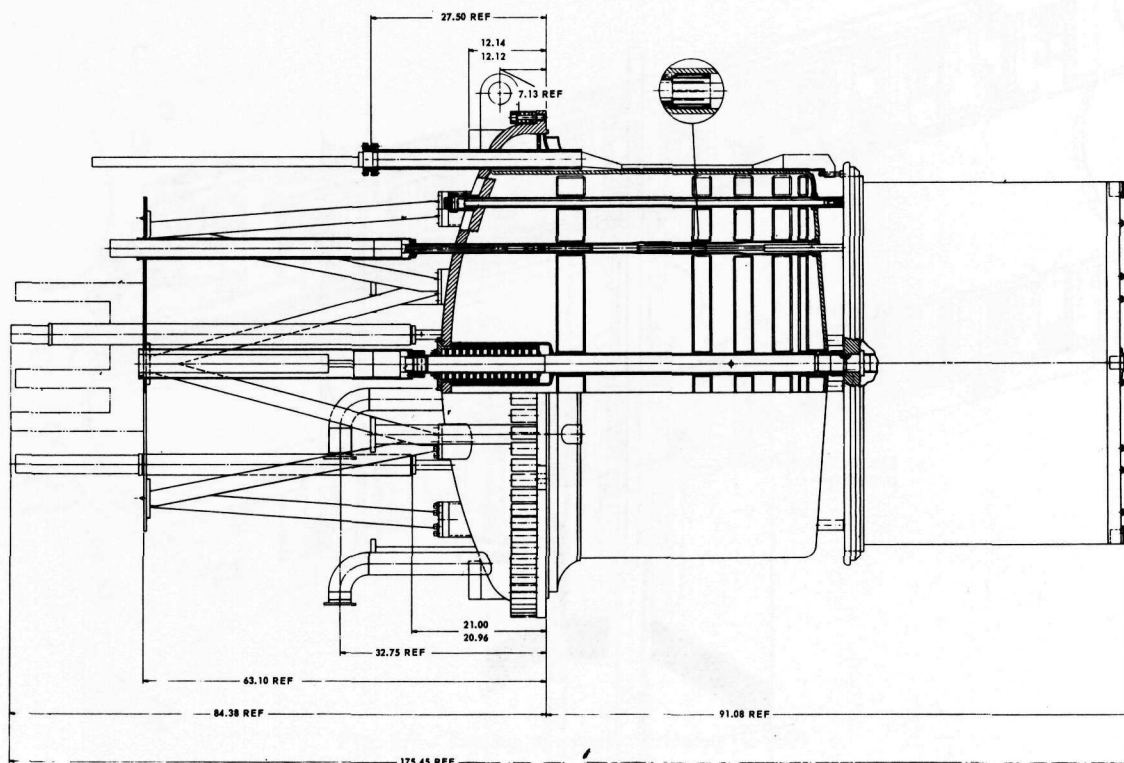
Side view of front shield plug assembly (Dwg. 134R648)
